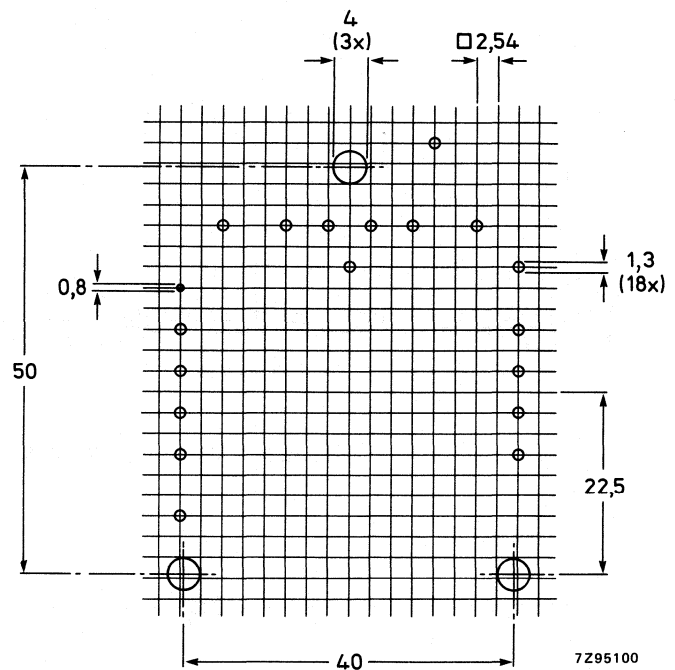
Hole pattern for mounting on a printed-wiring board (solder side).
